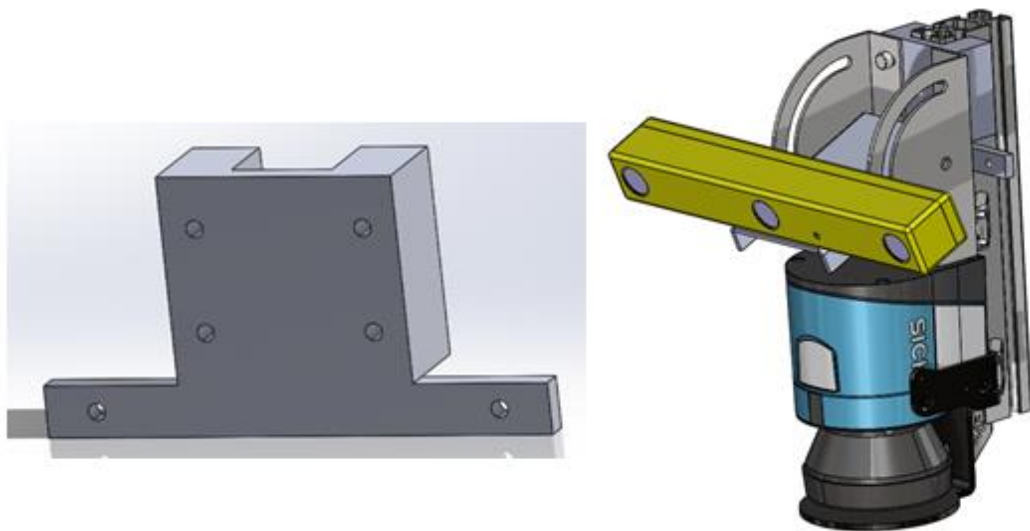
New holder piece on the left. Laser and camera with the new holder piece in the right.
